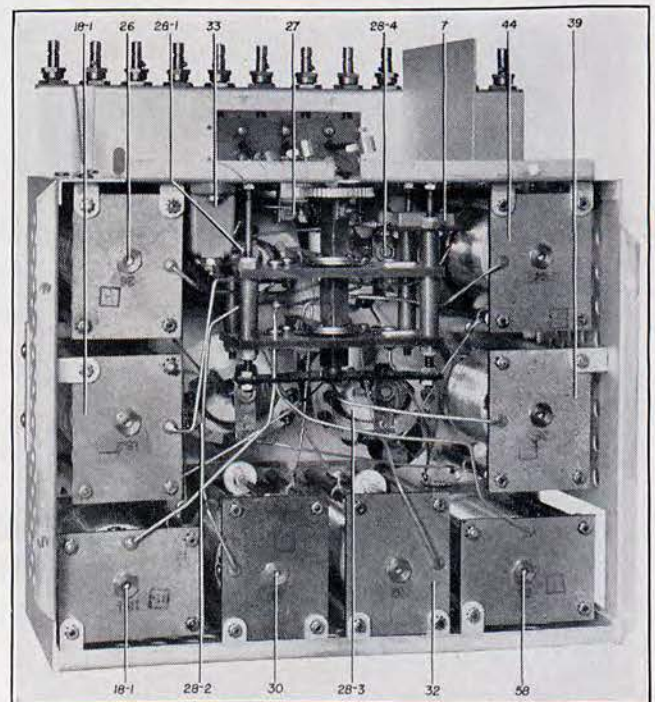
RADIO TRANSMITTER BC-338-A OR BC-353-A, COIL BOX, BOTTOM VIEW
